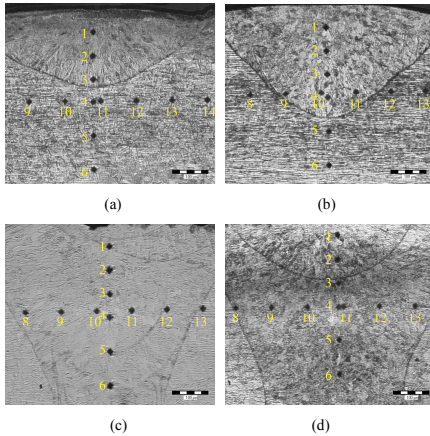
Weld cross sections after the microindentation test (sample I (a), II (b), III (c) and IV (d)).
